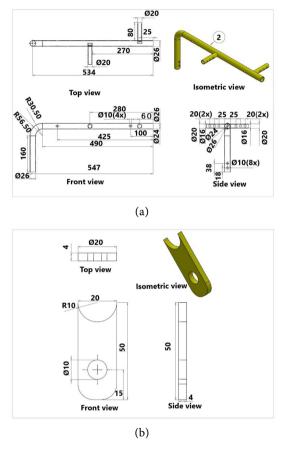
Different views of the main body frame assemble of the weeder (all dimensions are in mm). (a) Different views of the main body frame; (b) different views of the handle holder.
